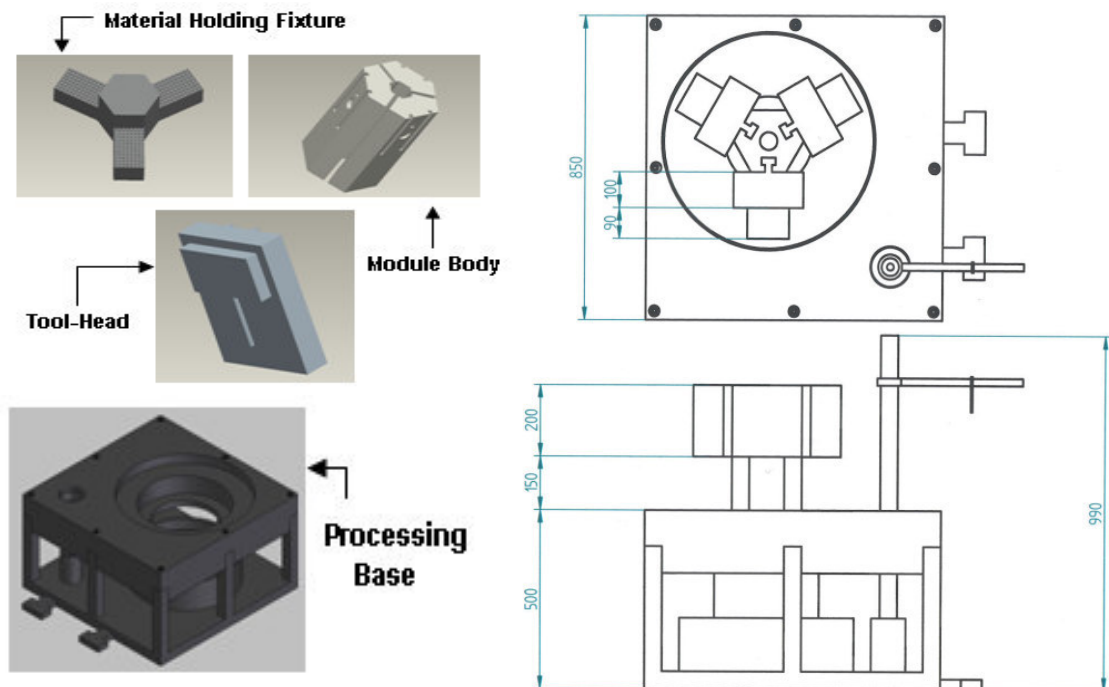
General and detailed views of the proposed machining module, including dimensions, in millimetres (mm).
